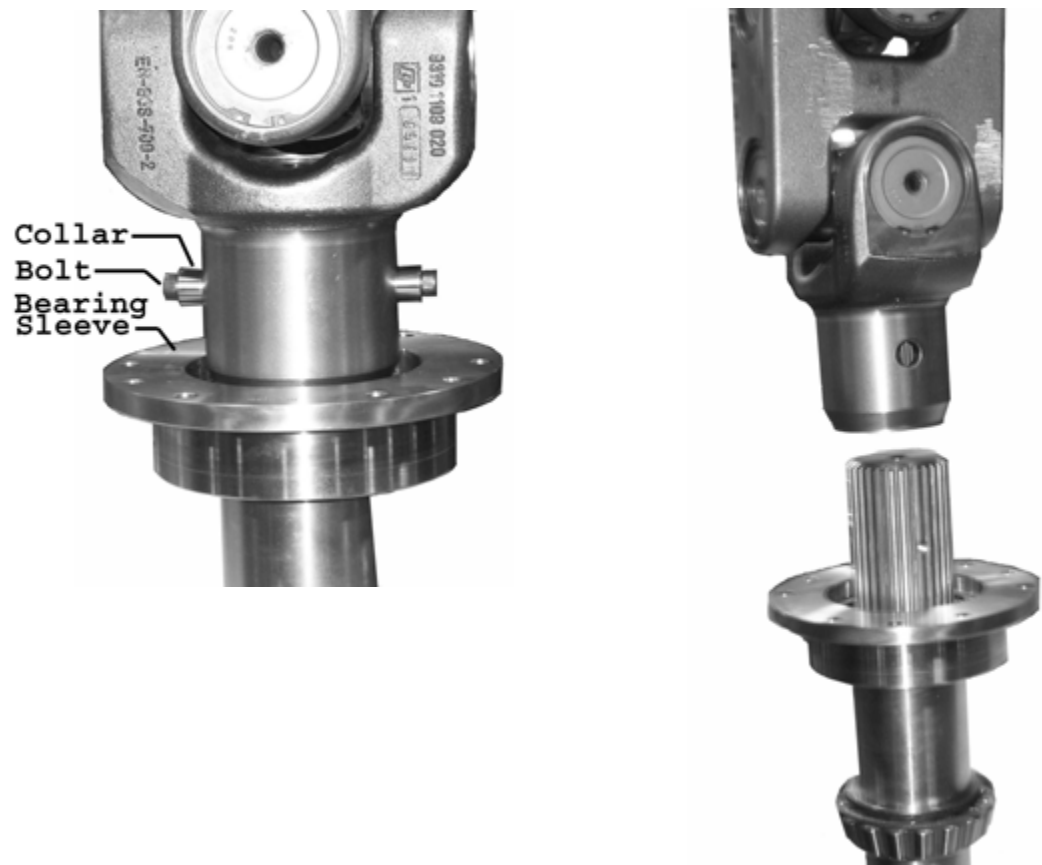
Stand Shaft Assembly and Support, Remove Bolts, Raise U-joint
